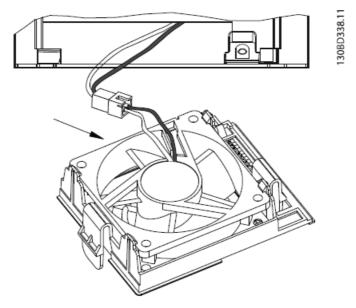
Fan Cable Plug. Plug Location Depends on Fan Type.
